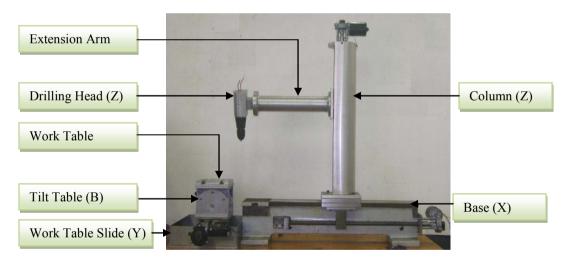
A Kinematically Viable Machine Tool for the Production of the Example Part
